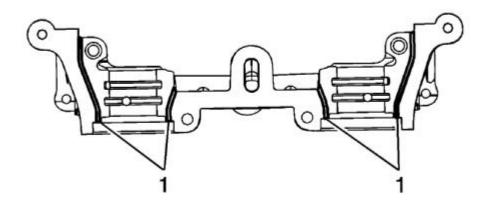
Sealing Surfaces Of Camshaft Bearing Cap Courtesy of GENERAL MOTORS COMPANY
